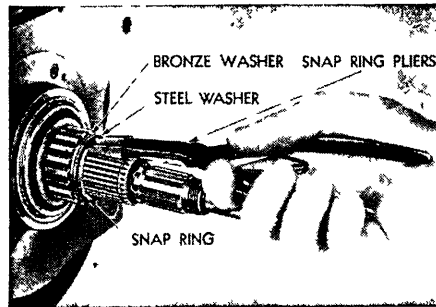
Remove front drive gear snap ring and take off steel and bronze washers. These washers have a smaller outside diameter than similar washers used elsewhere in the transmission and should be tied together and kept separate to avoid confusion when reassembling
